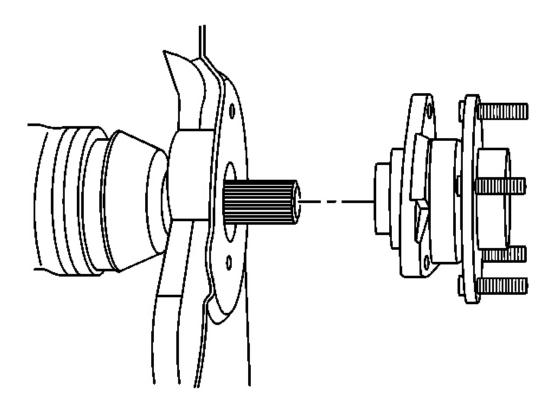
Wheel Hub, Bearing, Splash Shield & Steering Knuckle (4WD) Courtesy of GENERAL MOTORS CORP.
